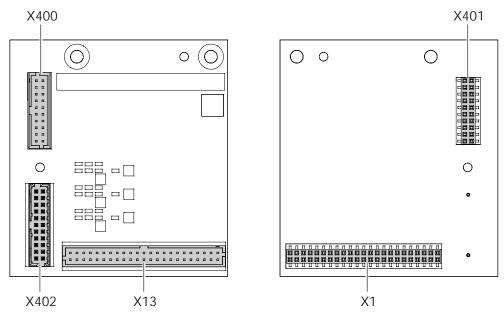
Connection module (MoNet) FCA2031, printed circuit board view of front and rear panels
